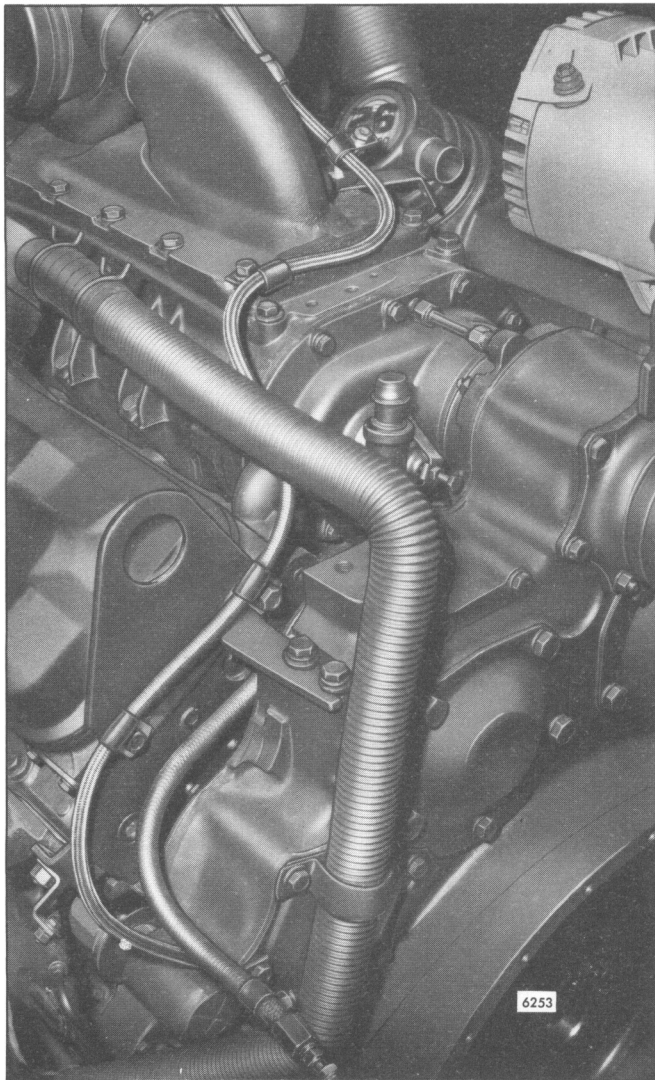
Typical 8V-92 Left-Bank Turbo Oil Supply Hose Routing
